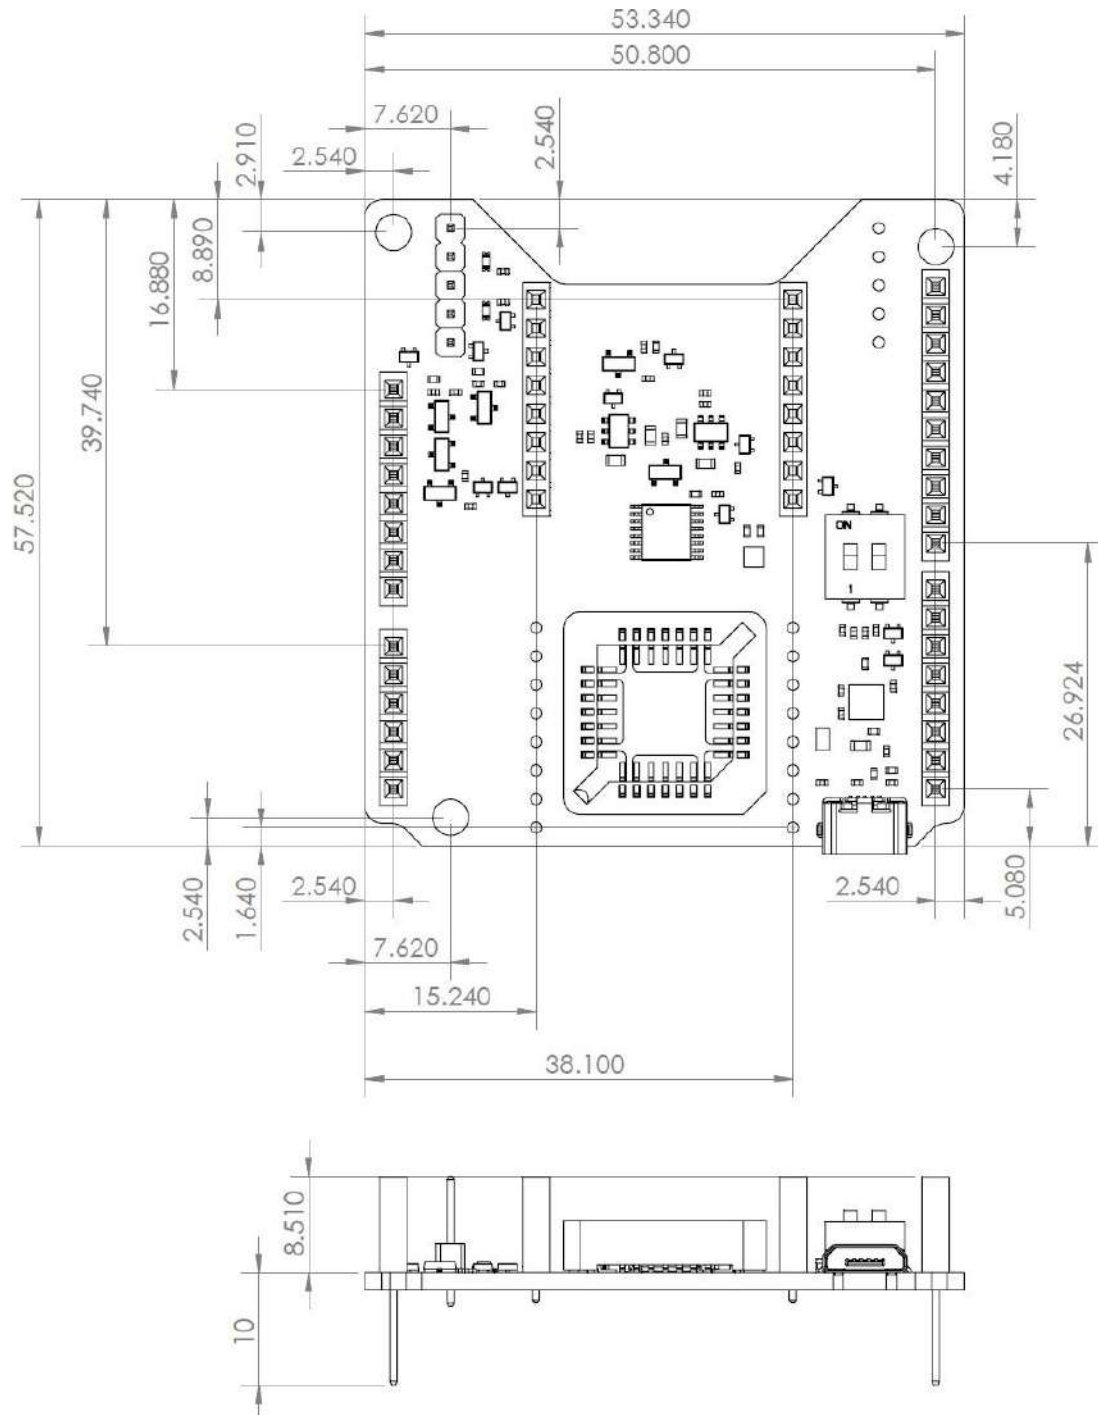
MTi 1-series Shield Board package drawing (Top and Side view)
